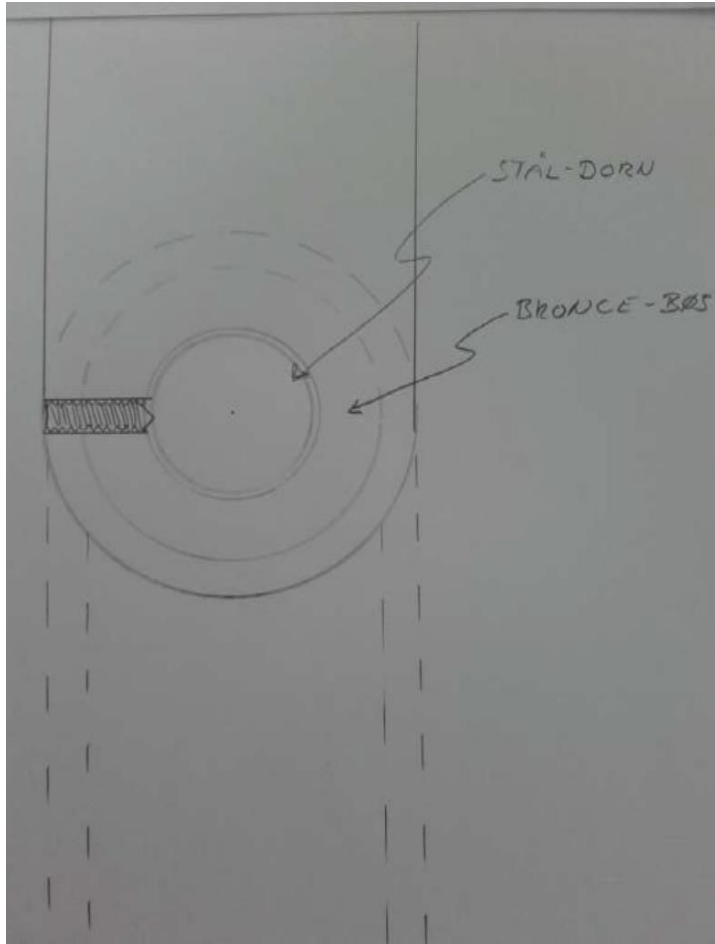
Rudder hinge from an axial look. The dowel/shaft in the middle, surrounded by the bushings. The socket screw is tightened into the dowel/shaft and by that, locking the dowel/shaft.
